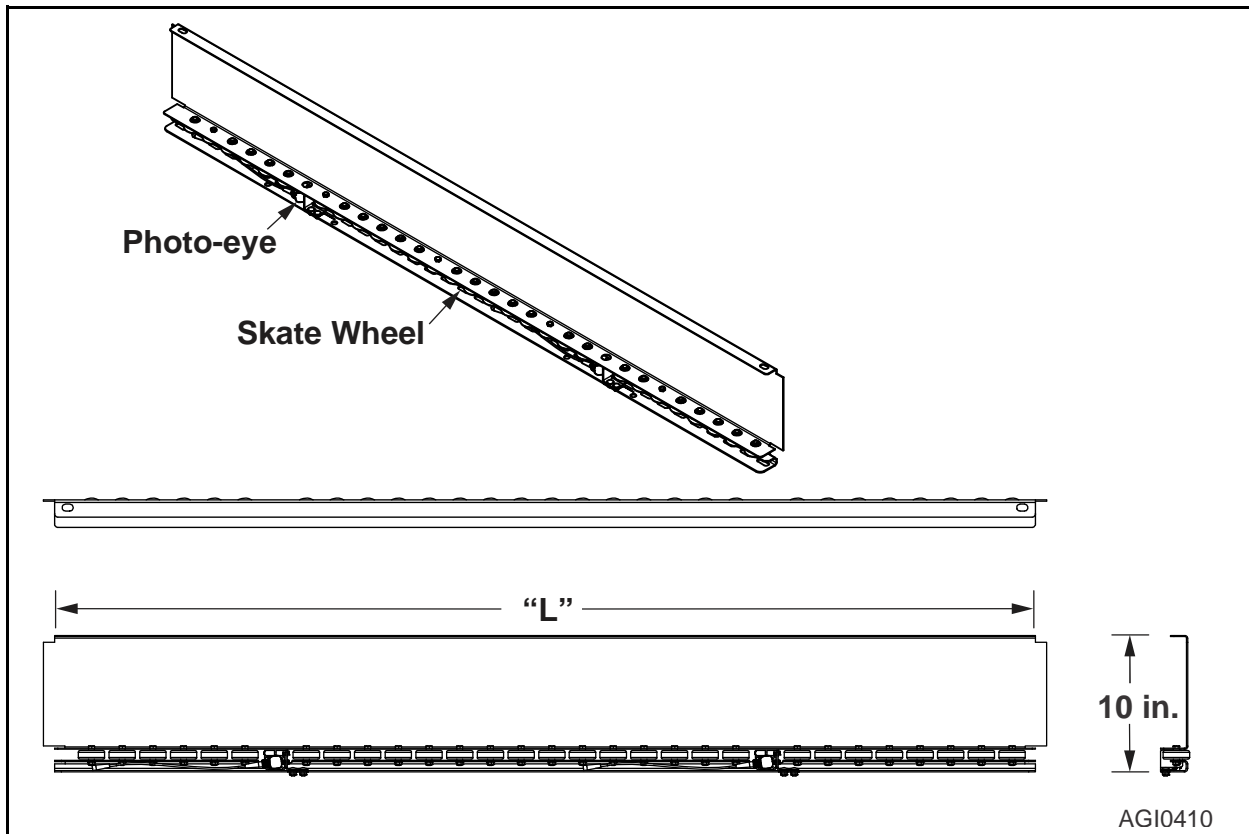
20 Skate Wheel Side Guide - 10 inch height shown
